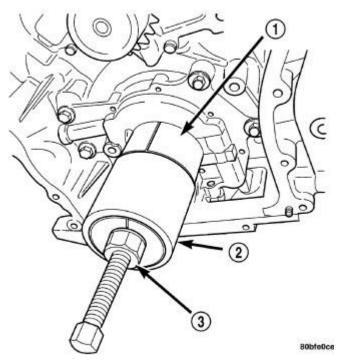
Crankshaft Sprocket - Removal Courtesy of CHRYSLER LLC
